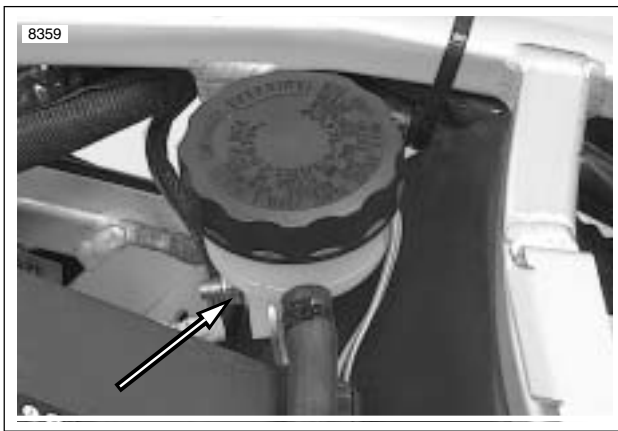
Inside Subframe Tail Assembly Hose and Wire Routing
